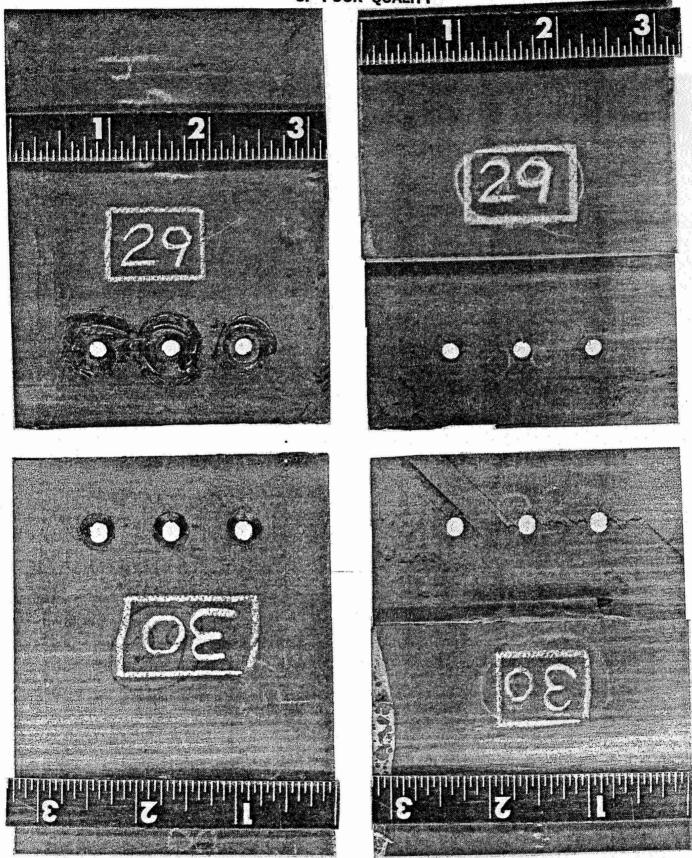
Failure of a Sealed Joint Specimen Tested Statically at $-65^{\circ}F$.
